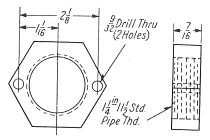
Pipe Flange Style No. 762198 for Use on Auxiliary Switches
